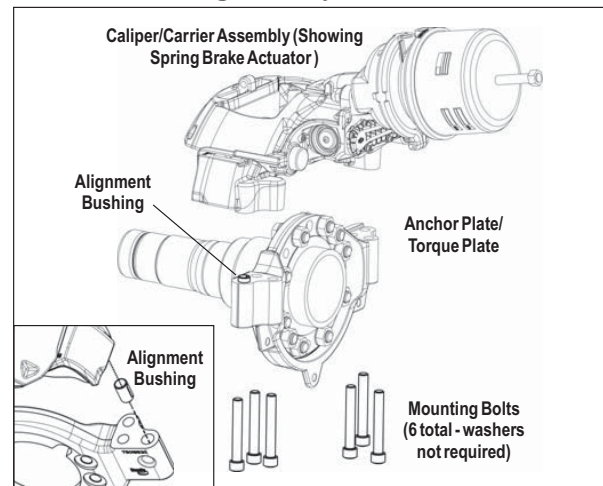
VERTICAL MOUNT CALIPER/CARRIER
